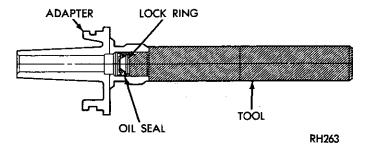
Installing Adapter Oil Seal And Lock Ring
